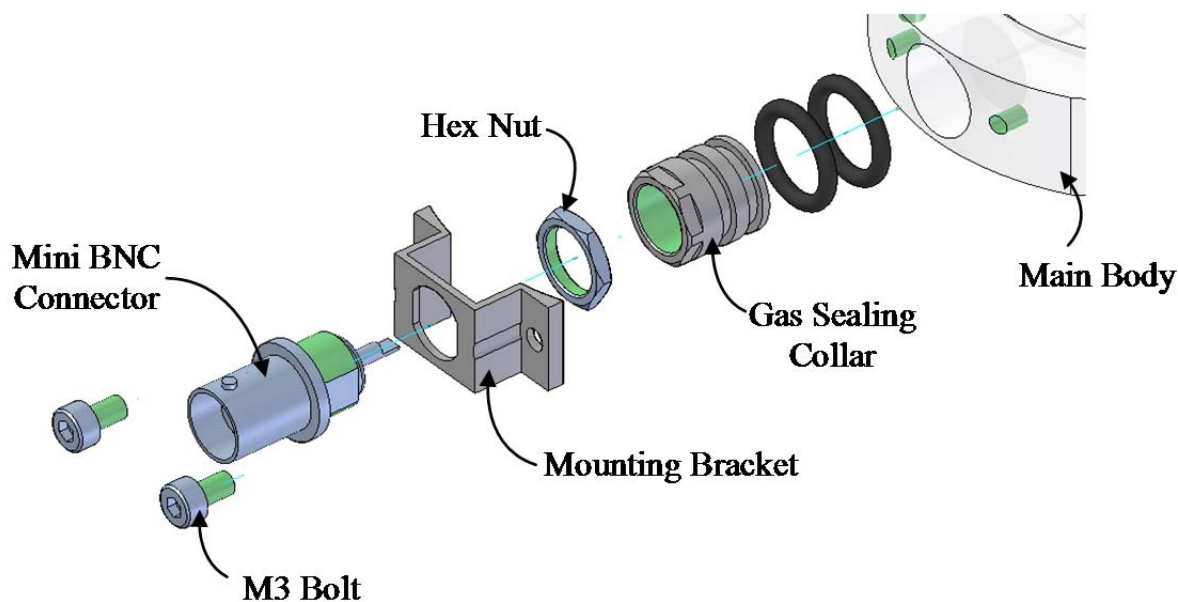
Rendered exploded view of the BNC ground plane connector assembly attached to the side of the non-contact cell
